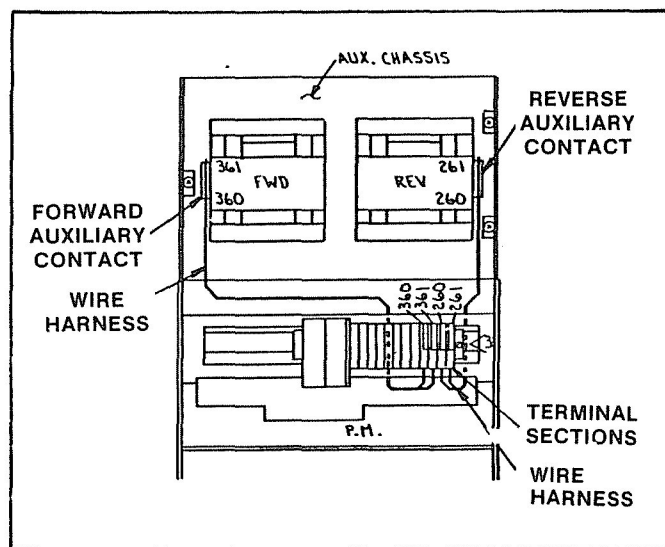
3-40 hp @ 460VAC, 15-20 hp @ 230VAC Bidirectional Auxiliary Contact Kit Installation
